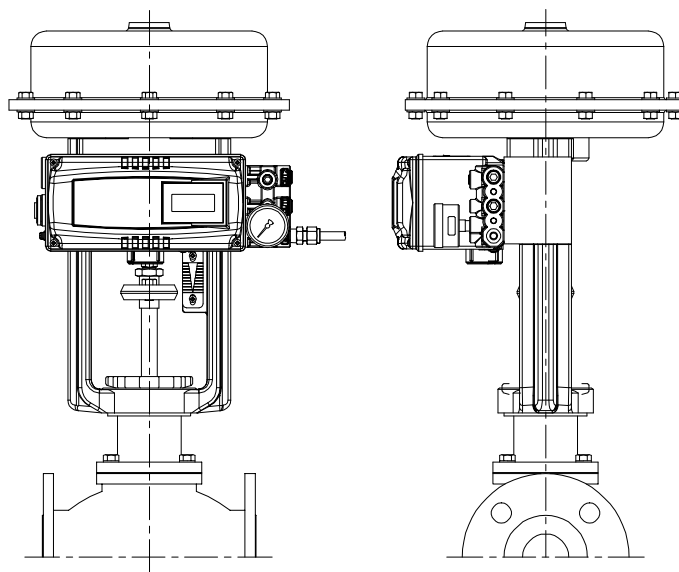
YT-3300L / 3350L installation of adapter lever type example
